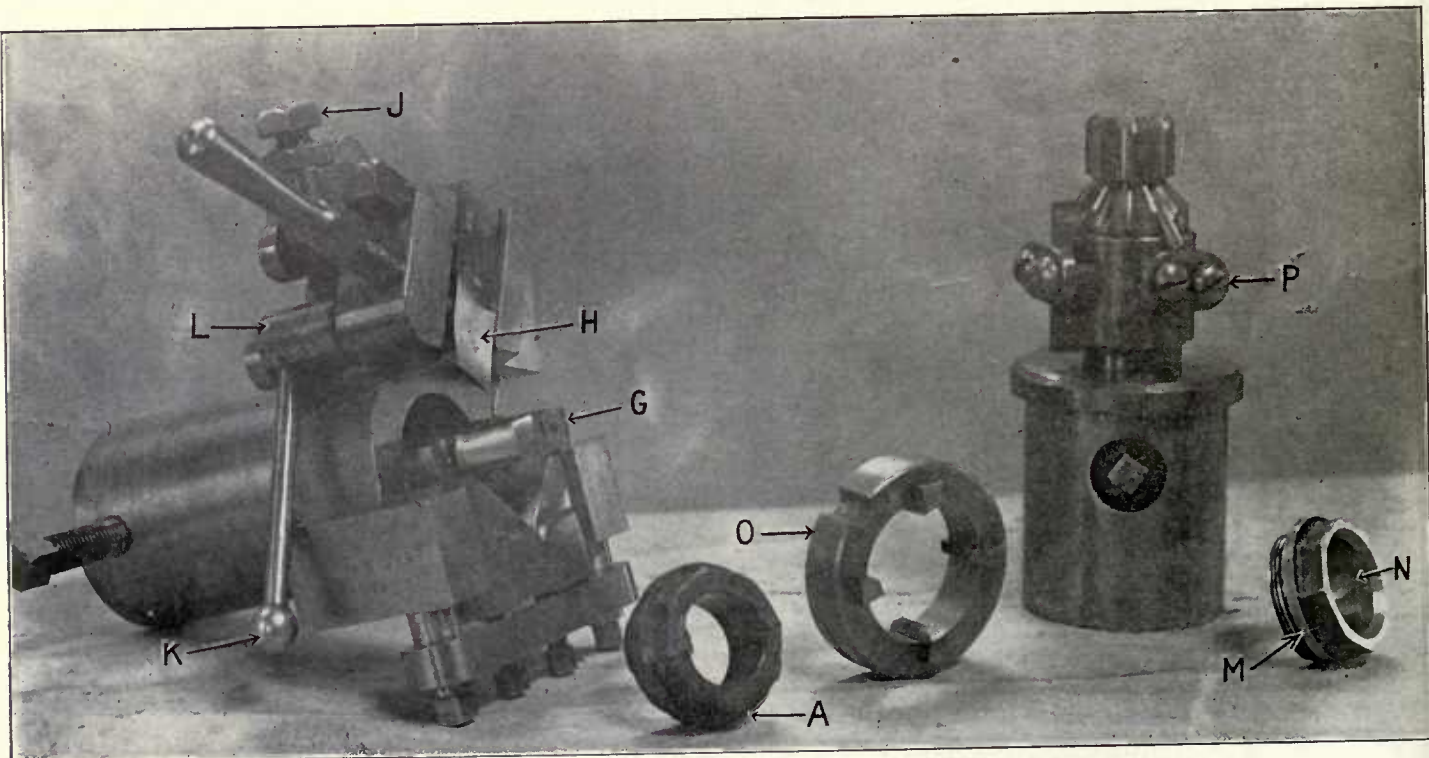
Tools for Machining Valve Seat for Air Pump.
